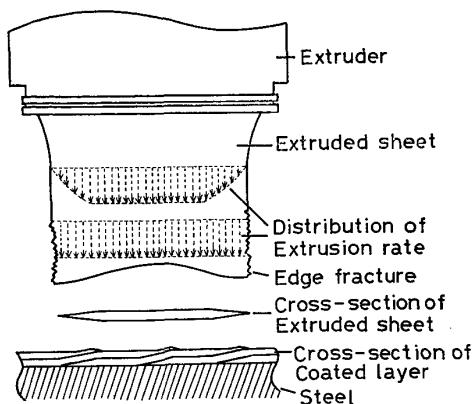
The cross-section of extruded polyethylene sheet with edge-drop and the appearance of coated polyethylene layer. Also the occurrence of the edge fracture is simultaneously shown.
